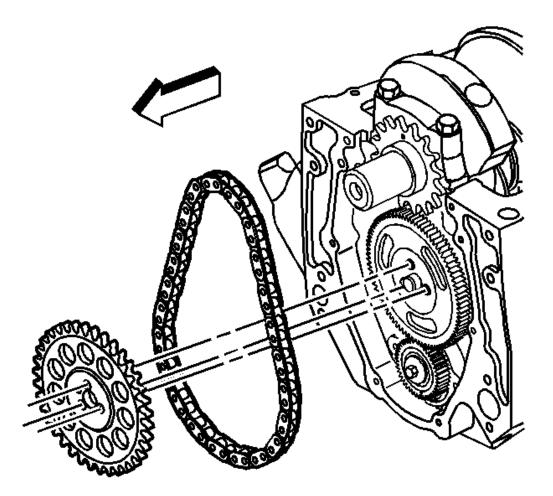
View Of Camshaft Sprocket & Timing Chain Courtesy of GENERAL MOTORS CORP.
